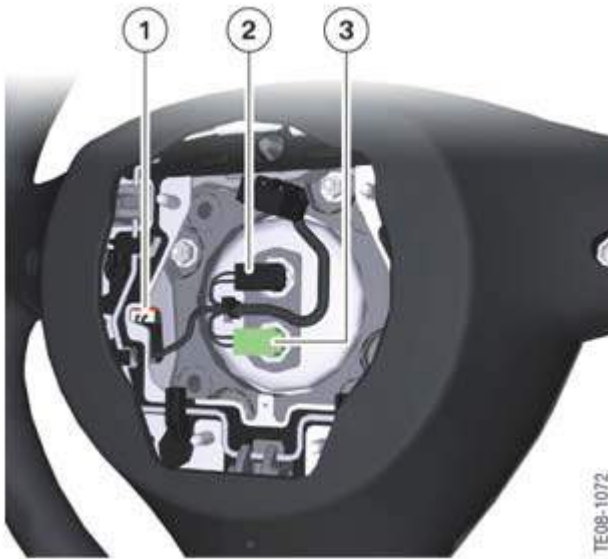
Identifying Adaptive Driver's Airbag Connections (Rear View)
